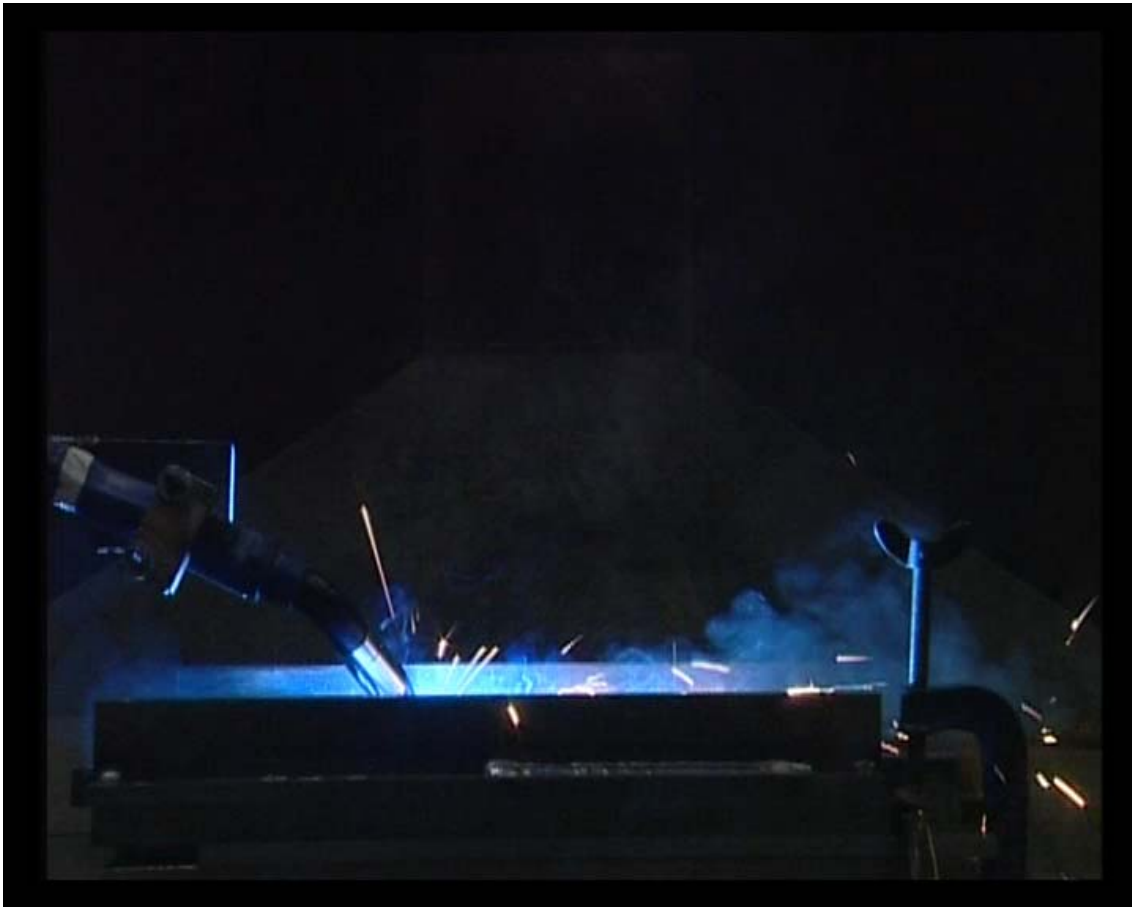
Fillet welding without extraction using a 1.0 mm wire
